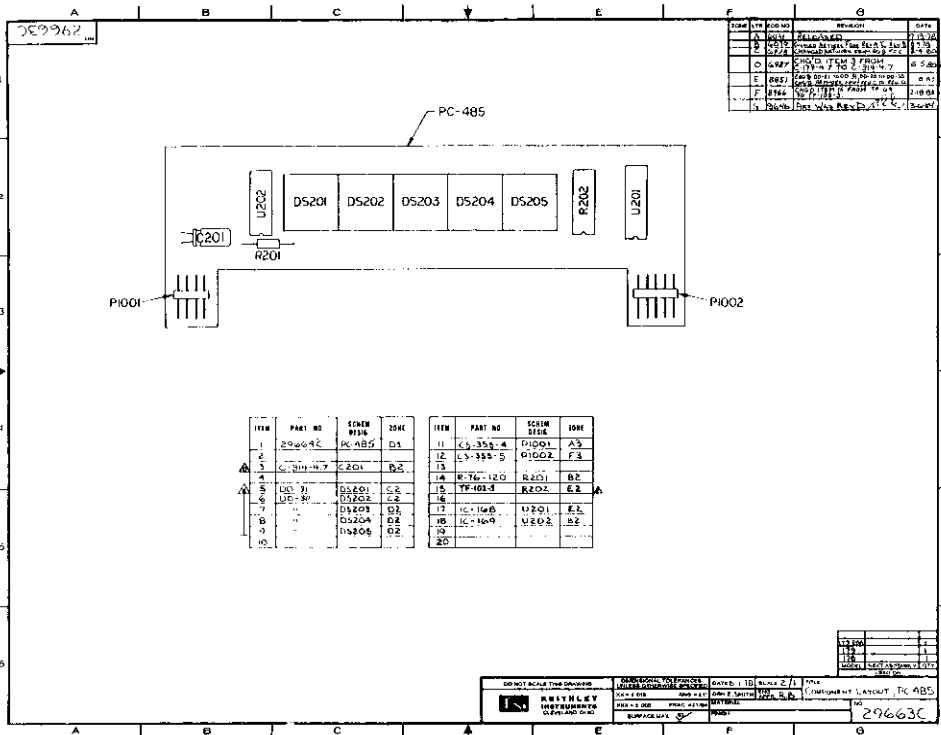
Model 179A Display Board PC-485, Component Location Drawing, Dwg. No. 29663
